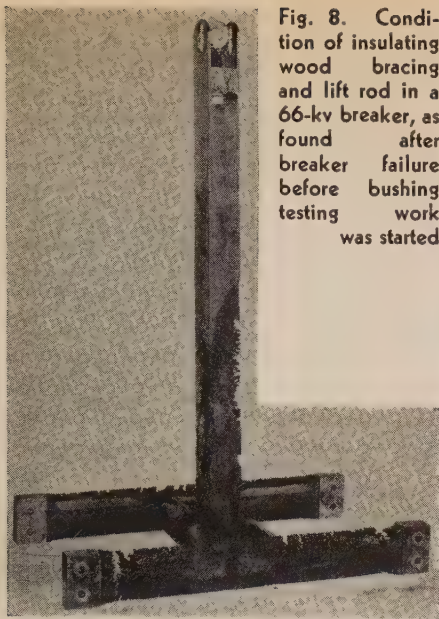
Condition of insulating wood bracing and lift rod in a 66-kv breaker, as found after breaker failure before bushing testing work was started
